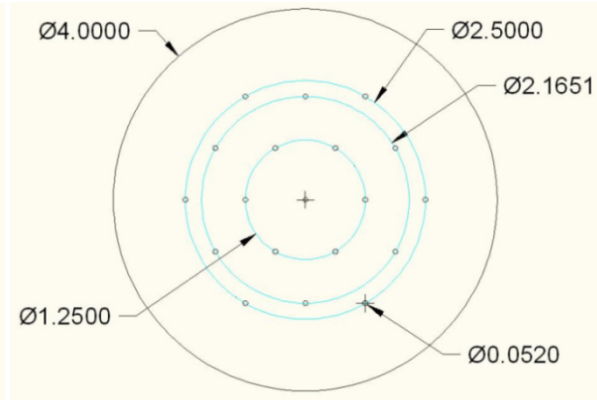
CAD drawing of distributor plate used for EconoProp. $N_{or} = 19$. Dimensions in inches
